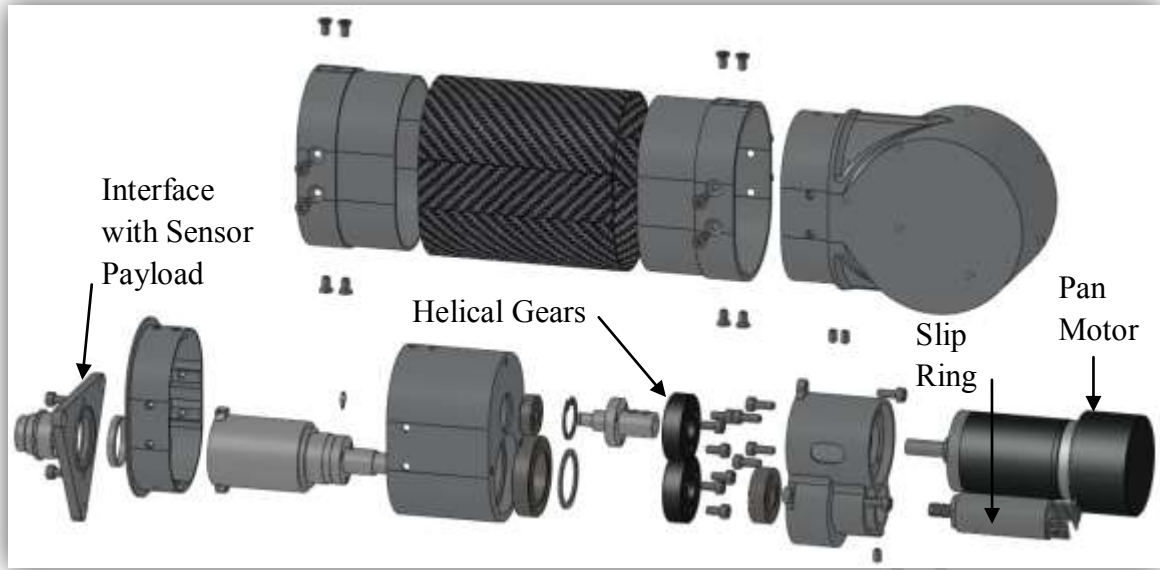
Exploded View of Pan Section of Manipulator Arm
